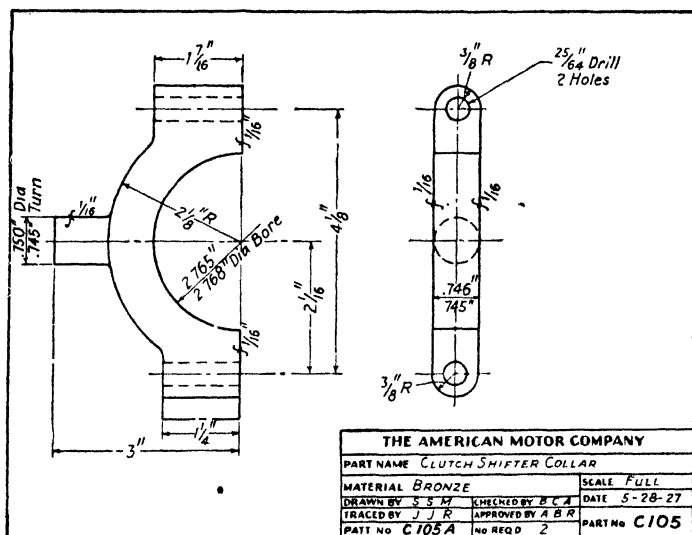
A detailed drawing of one of the parts used in the flywheel clutch.
